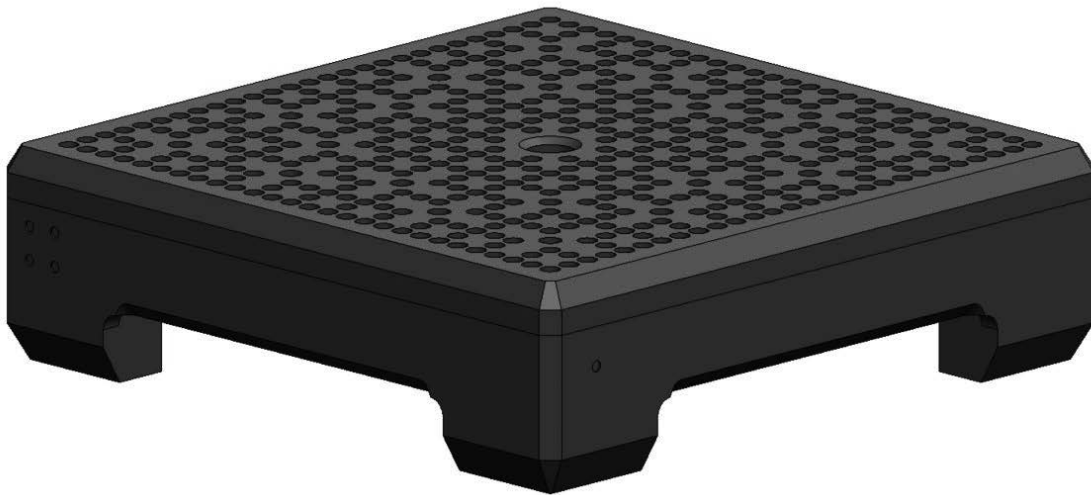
Standardized Debris Filter Bottom Nozzle (3D View)
